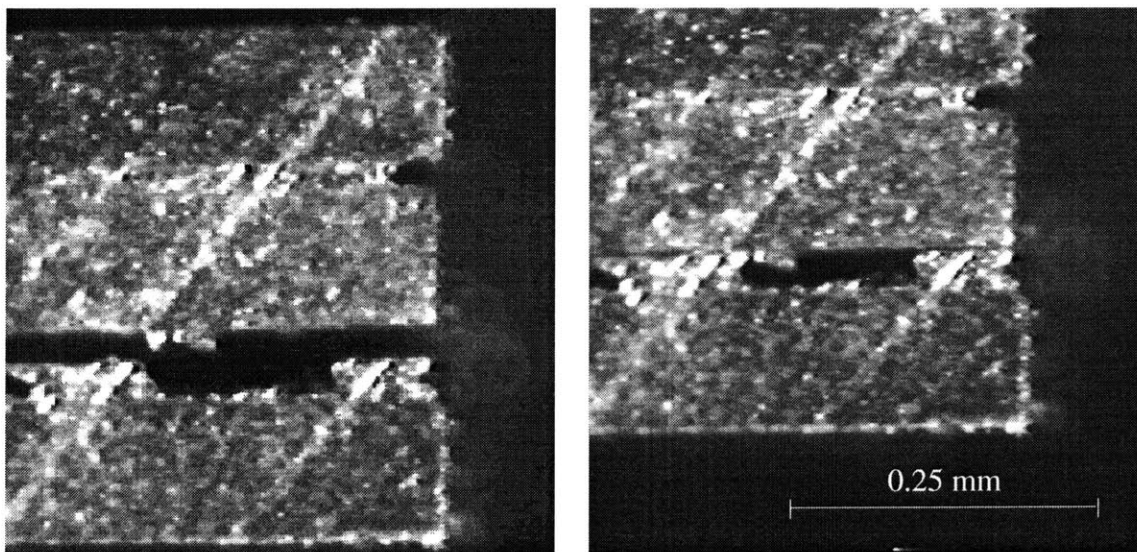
A micro-crack initiating at a void in the solder joint.
